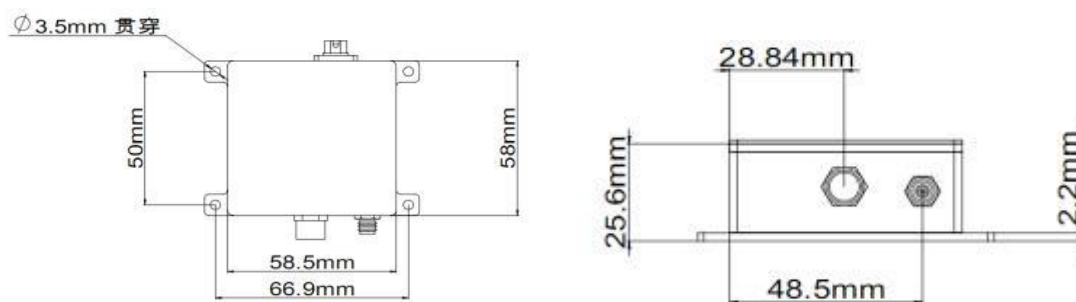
APD Detector Module Mechanical Dimension Diagram
